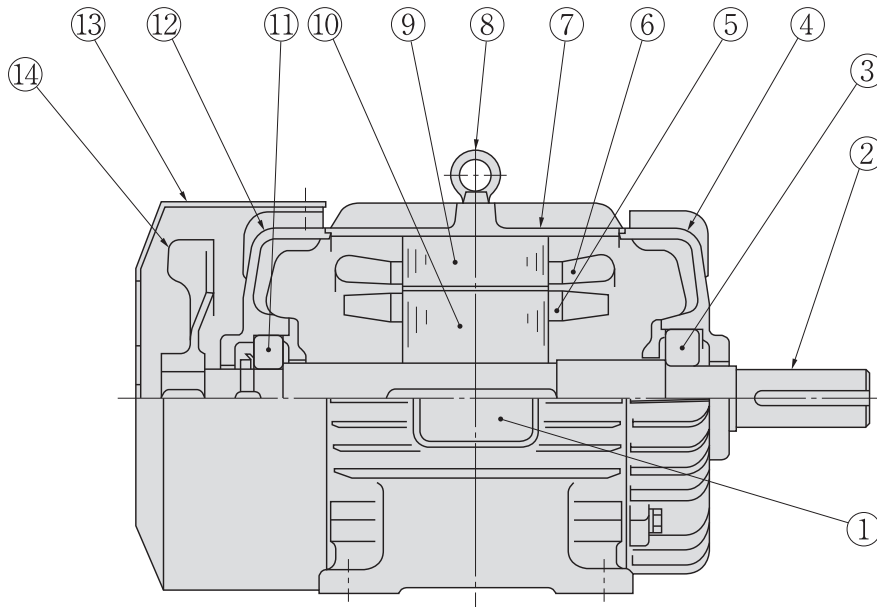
Totally enclosed fan cooled squirrel-cage motor
